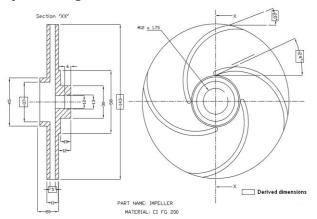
New Impeller (Y1) With Derived Dimensions 3.4. DEVELOPMENT OF NEW CASING DESIGNS (PHASE II)
